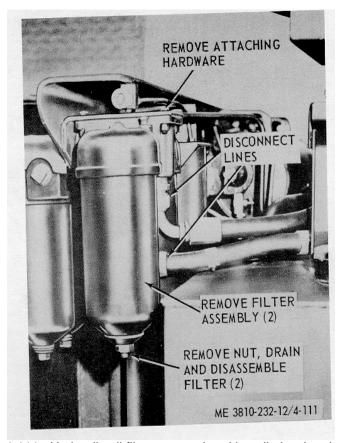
Hydraulic oil filter, removal and installation (model 2380).
